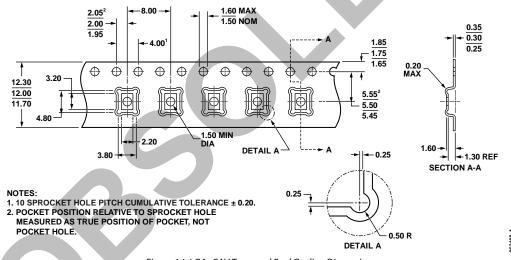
LGA_CAV Tape and Reel Outline Dimensions Dimensions shown in millimeters
